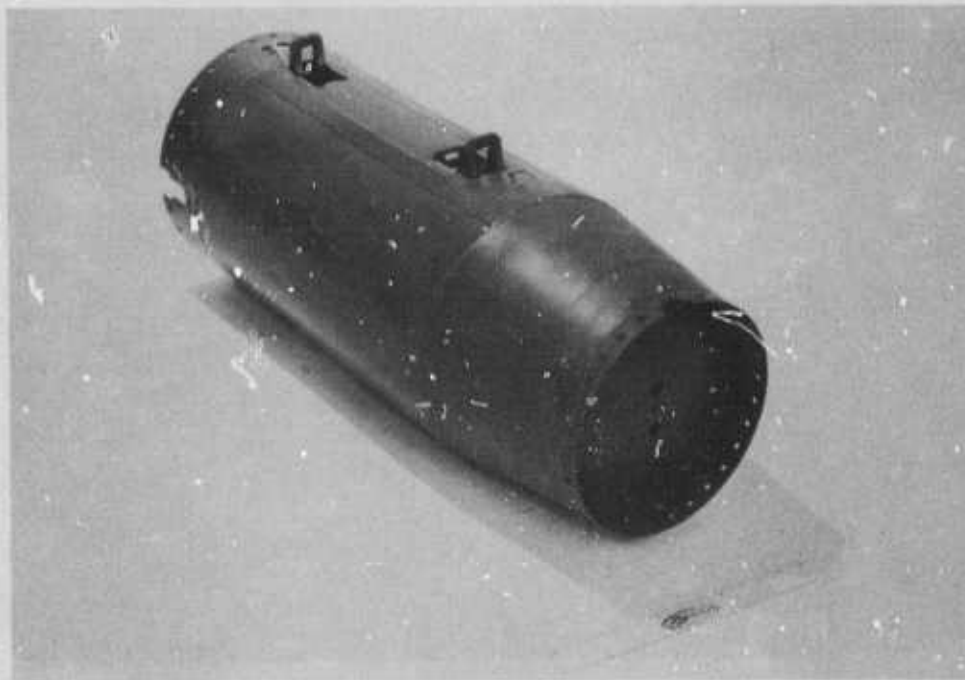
Fuel Tank Assembly Showing Forward Closure.
